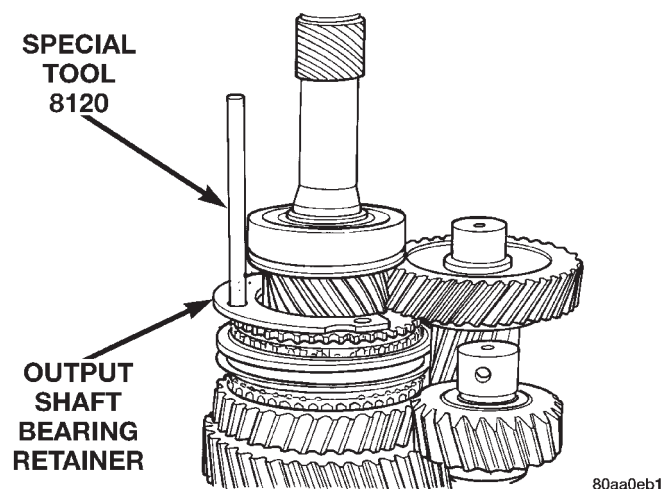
Positioning Output Shaft Bearing Retainer For Rear Housing Installation
